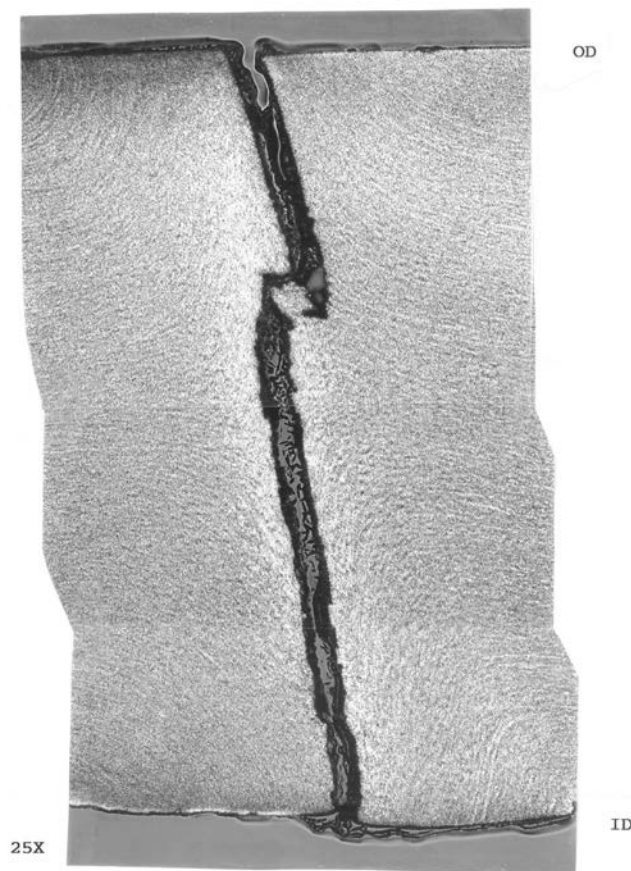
An Example of Fracture at a Hook Crack Failure Origin Jumping into the Bondline of the Seam
